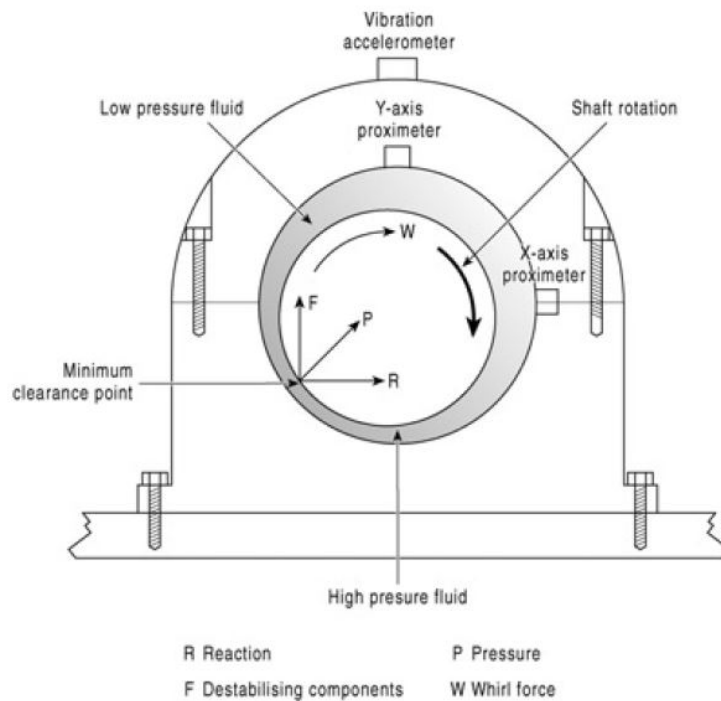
Sleeve bearing and Forces acting on a shaft (Tavner et al. 2008)
